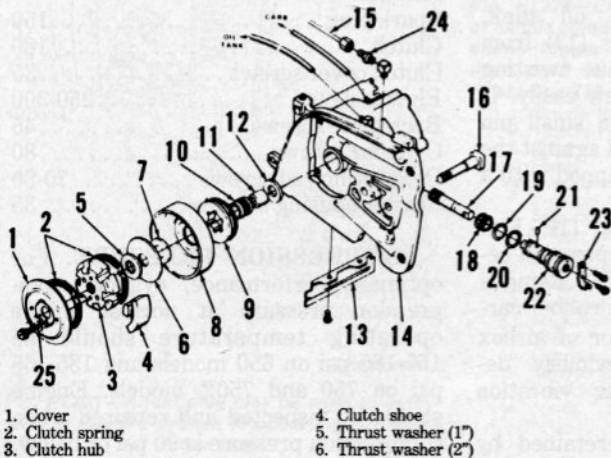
Exploded view of clutch and oil pump assemblies.
